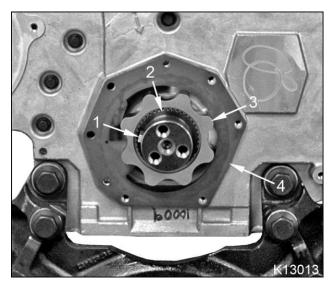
Vibration damper key, inner rotor, and oil pump housing plate
